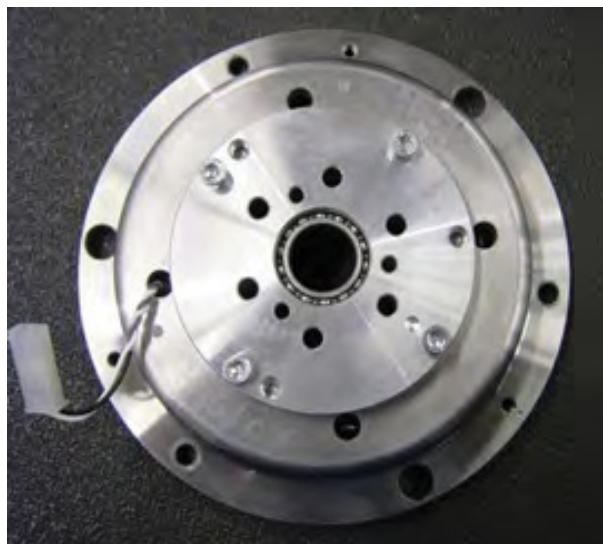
(Radial Magnetic Bearings) and Figure 72 (Axial Magnetic Bearing). Centered rotation is instantaneously self-corrected and maintained by the bearing control loop. See Figure 65 (Bearing Control Signal Flow).
